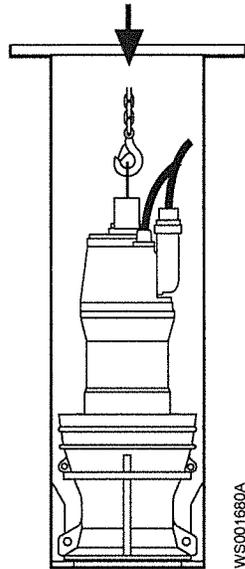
Lower the pump to its final bottom position. A generic propeller pump is shown.
